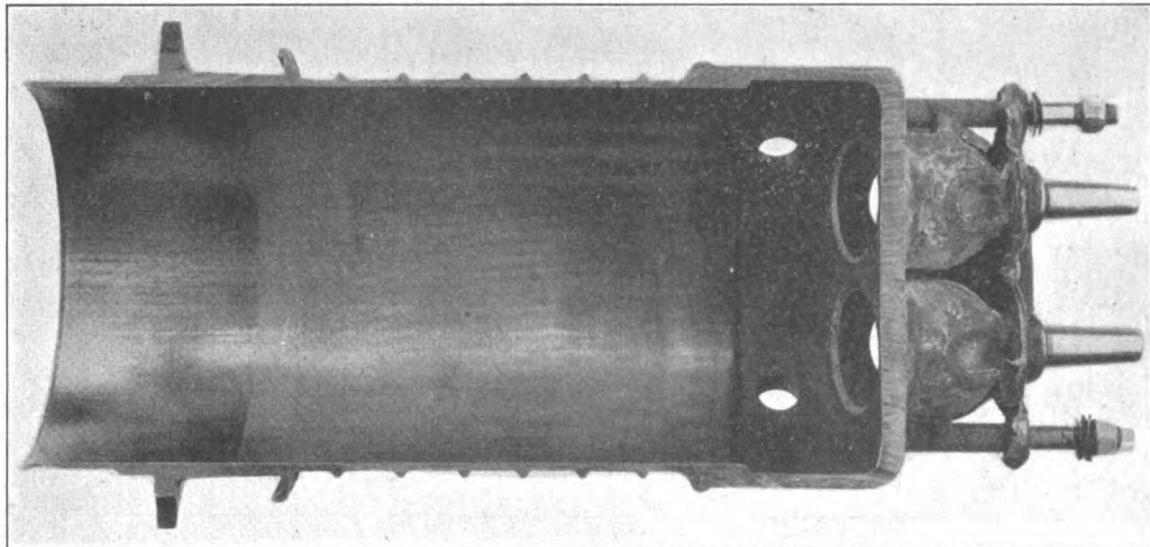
Sectional view of cylinder. A water leak developed in this cylinder after 40 hours and 15 minutes running at the junction of the cylinder head and barrel. The crack in the cylinder weld is not shown in this figure.
